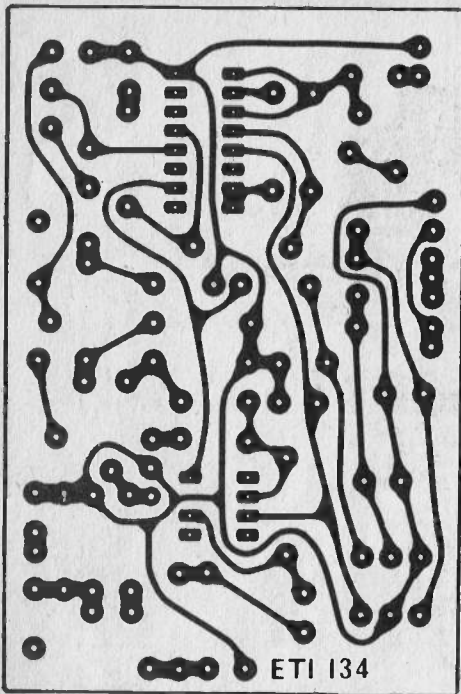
Printed circuit layout. Full size 90 x 60 mm.
